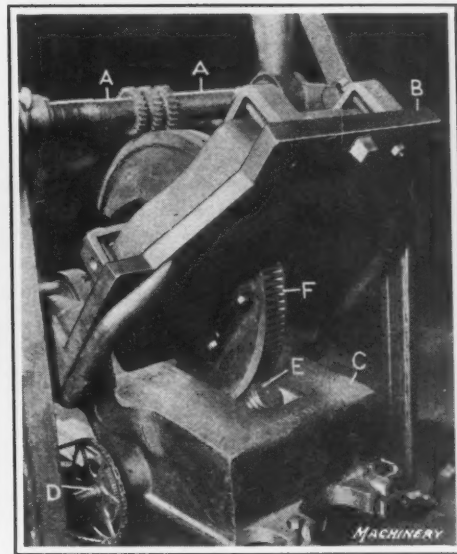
View of Milling Fixture with Table Elevated, showing Special Feed Gearing
